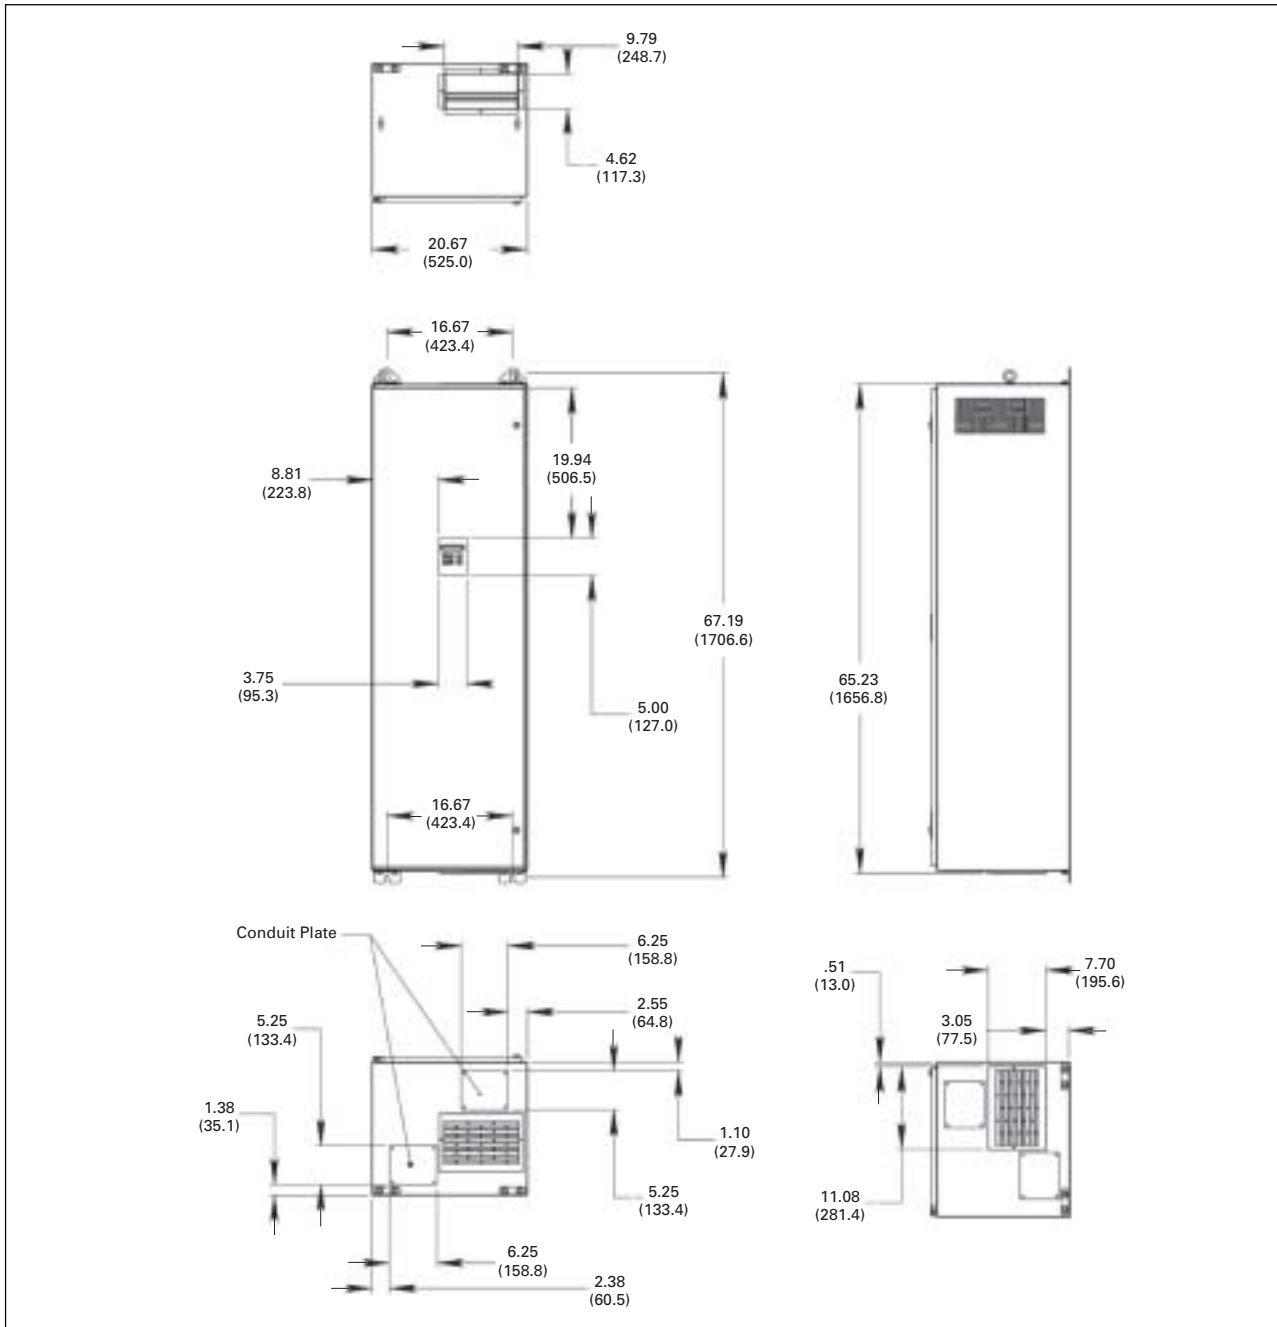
HCU100 — 100 Amperes — Dimensions in Inches (mm)
